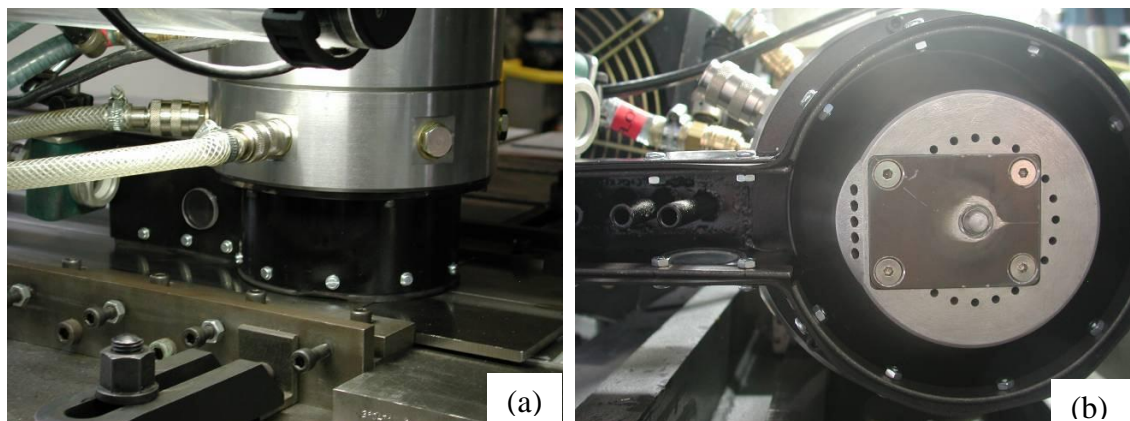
The SSFSW welding head: (a) External view; (b) underneath view (Russell et al., 2007)
